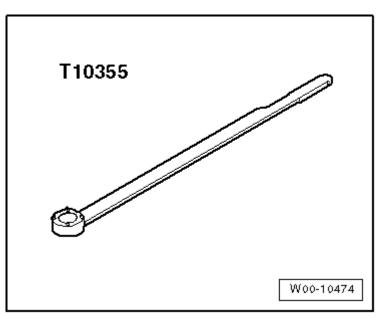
Counter-Holder Tool T10355 Courtesy of AUDI OF AMERICA, LLC
